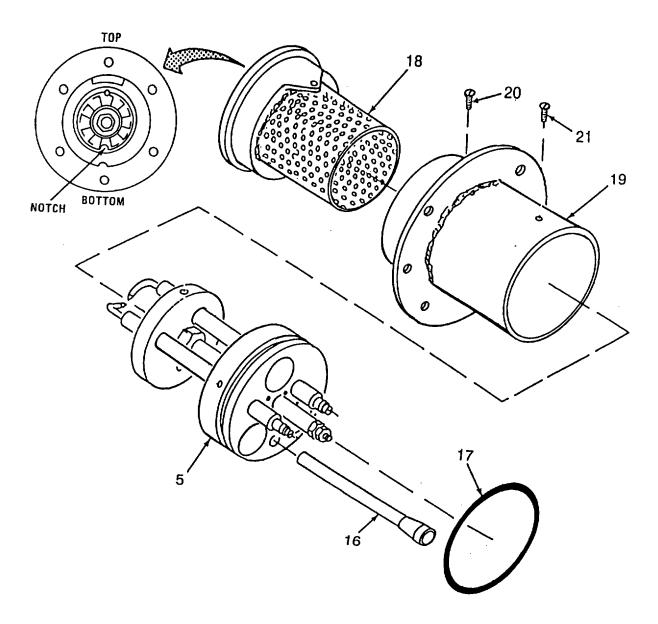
Burner Assembly (Sheet 5 of 5)
